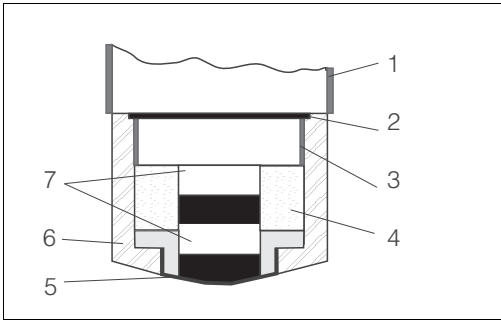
Sensor head with membrane cap (Side view with cut-away view of membrane cap)
